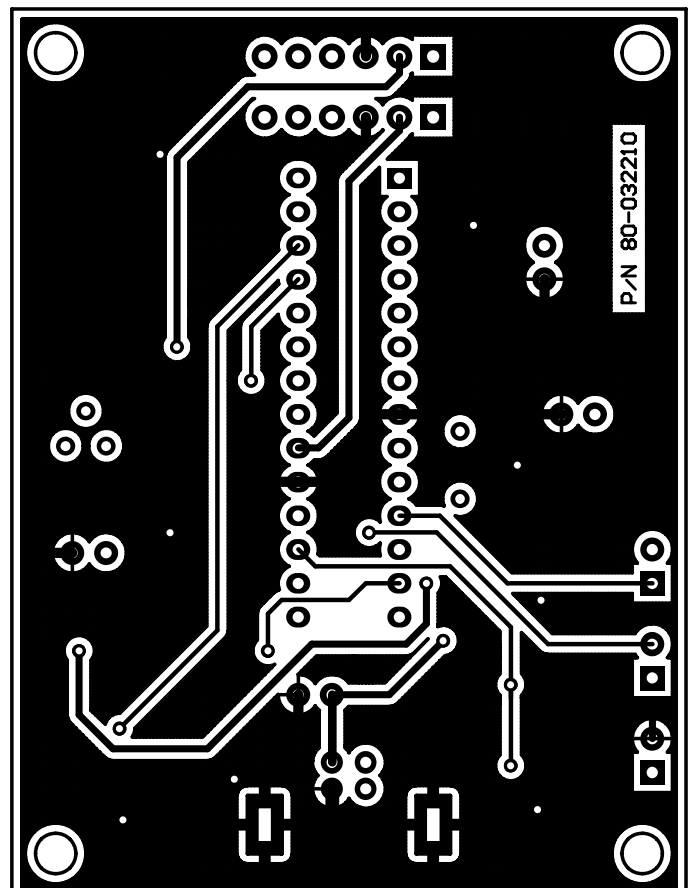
ePIC-KIT2 PCB Copper Pattern (Top Layer)
